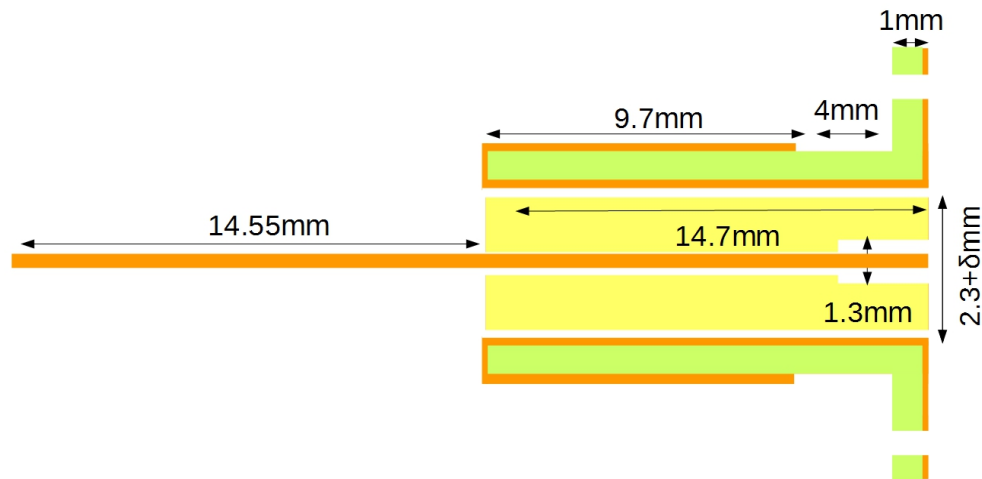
Sectional schematic view of the assembled 3D printed and metallized antenna
